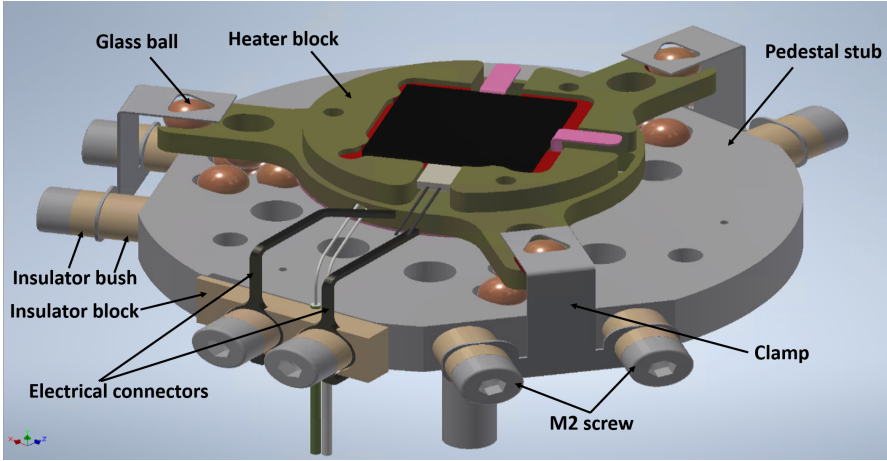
CAD drawing showing the 3 clamps which are used to fix the heater block over the pedestal stub. The electrical connection to deliver power to the Pt heater is implemented by 2 electrical connectors.
